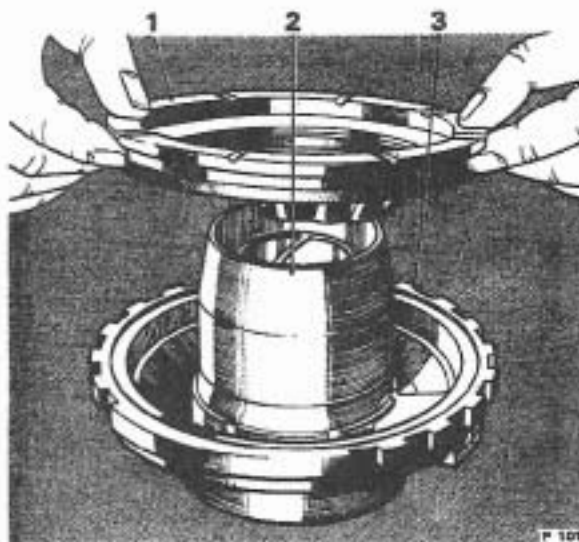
FITTING THE INTERMEDIATE CLUTCH PISTON
